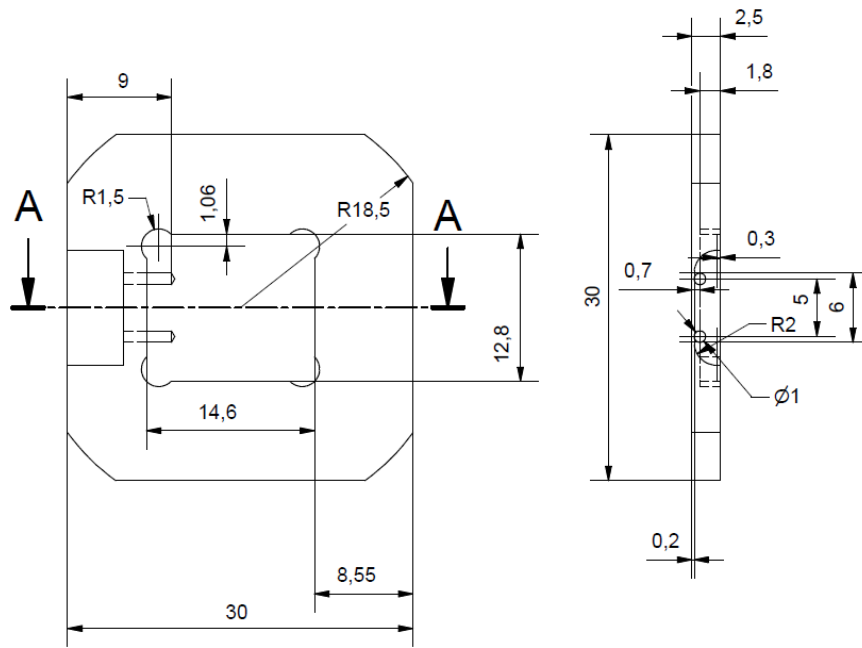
Technical drawing of the PEEK Holding of the detector, which is hold on top of the magnet with the holding structure shown in figure 5.8.
